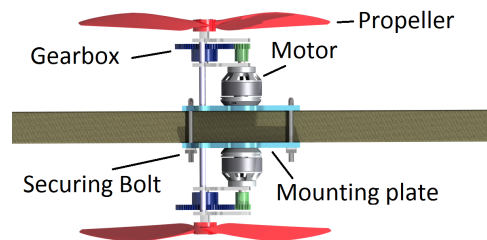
Computer drawing of mounting of the propeller, gearbox and motor mounting to the airframe.
